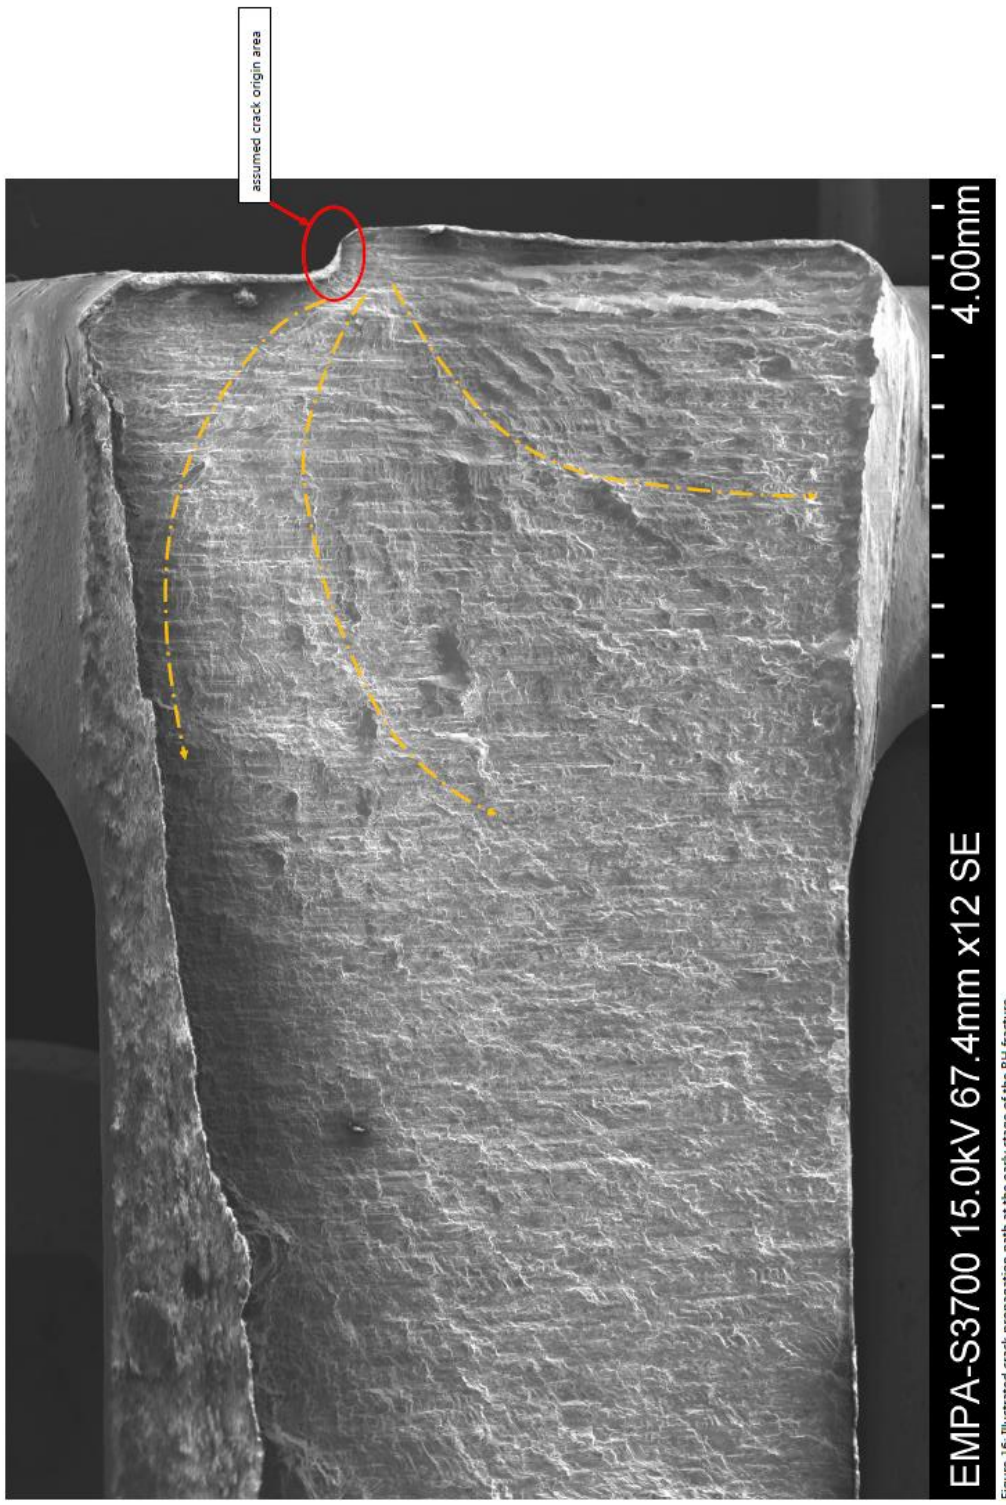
Illustrated crack propagation path at the early stage of the RH fracture
